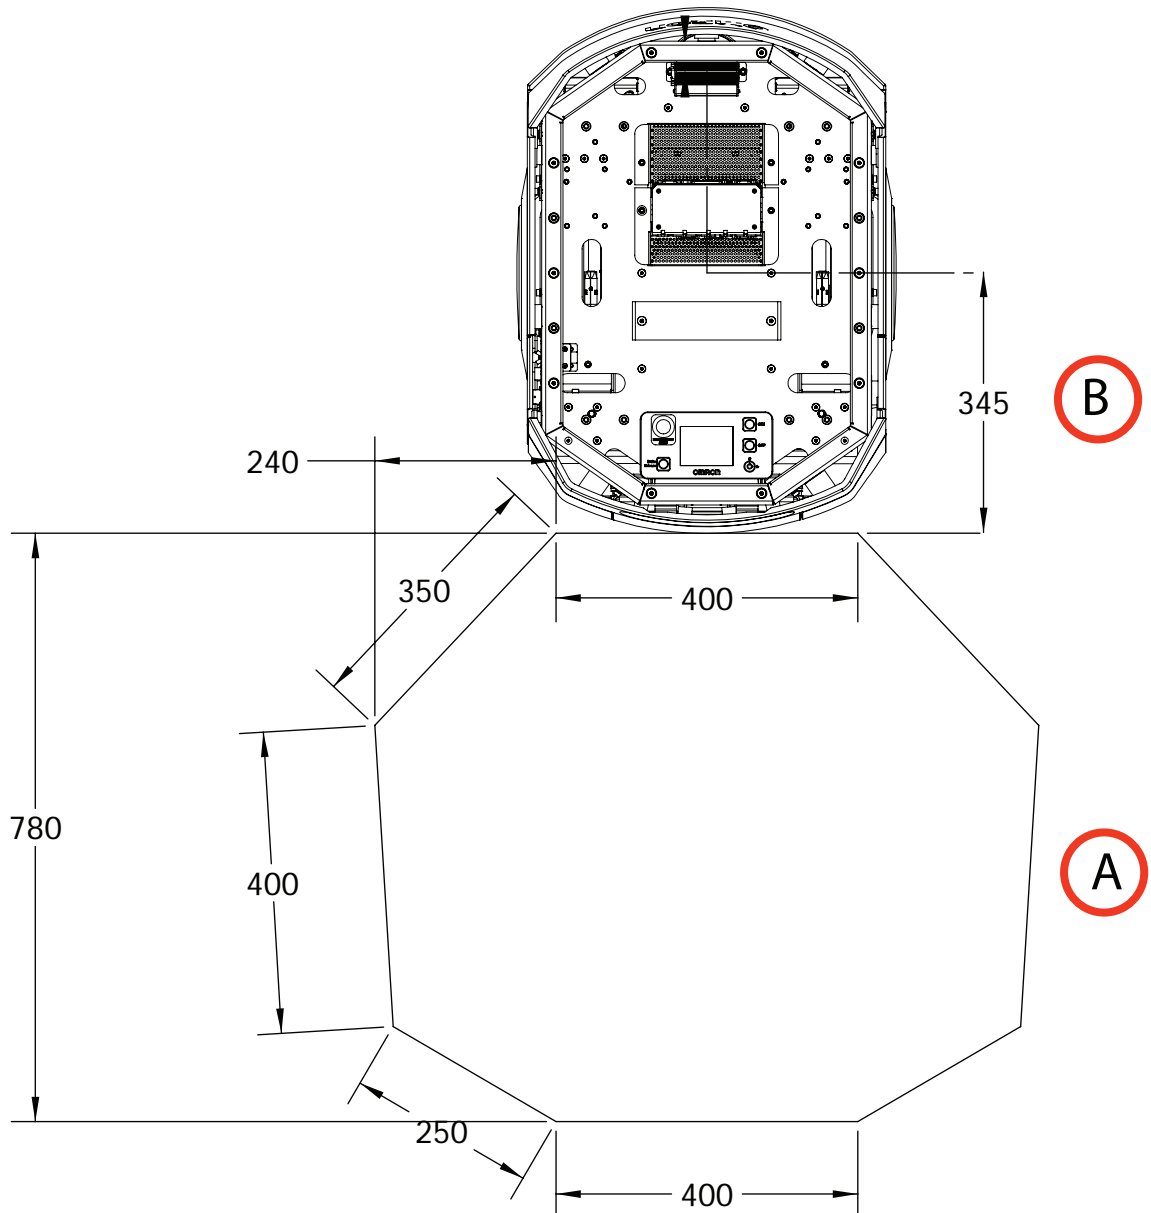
Sonar fields of view (A), Drive wheel center (B)
